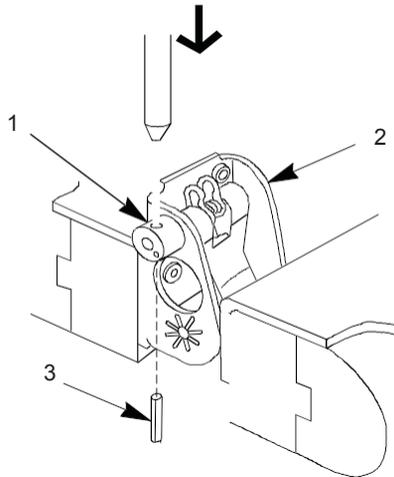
Rear Sight Base, Spring Pin, Windage Knob.
